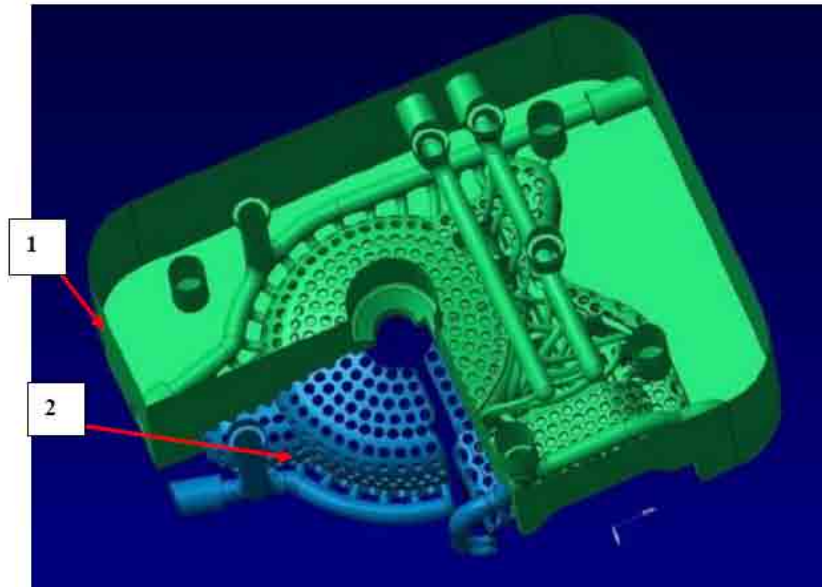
Mould cavity CAD model (1) with honeycomb shaped surface cooling (2) [3]
